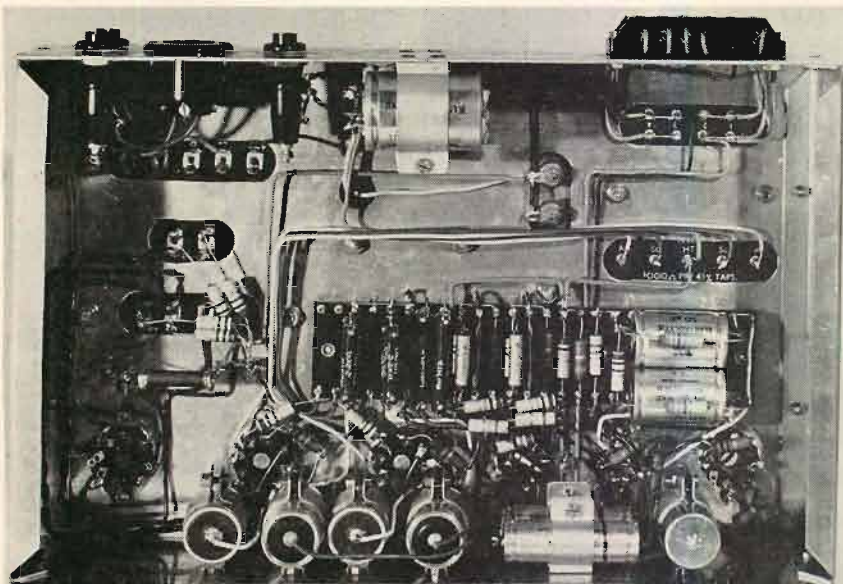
Underside of chassis, showing placement of parts and wiring arrangement.
